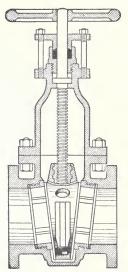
"Chapman" Gate Valve with Wedge-Shaped Sides.
